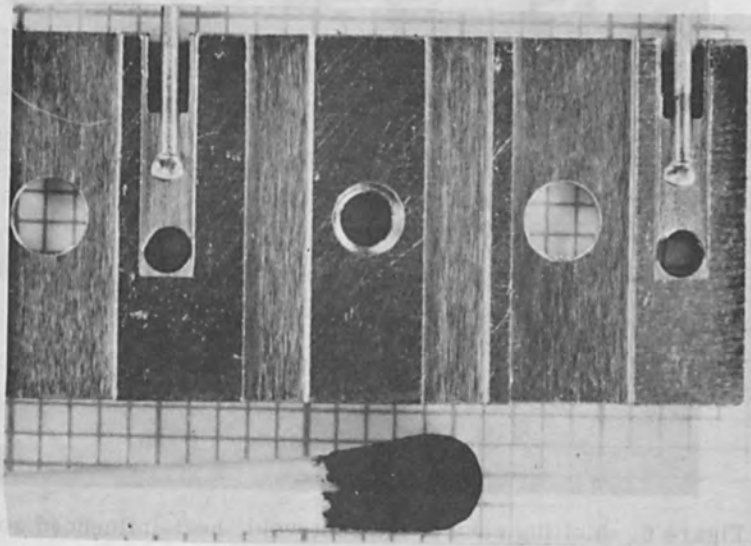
Small weld pimples on bottom side of socket indicate perfect through welding.
